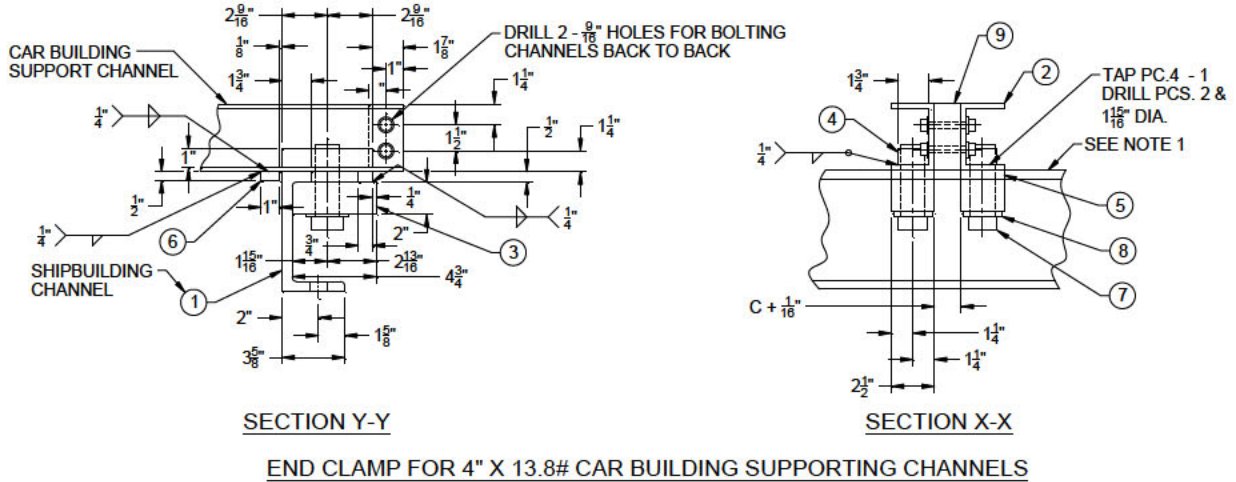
Section details of standard mounting platform for testing equipment on the MWSM. (Sheet 1 of 3)
